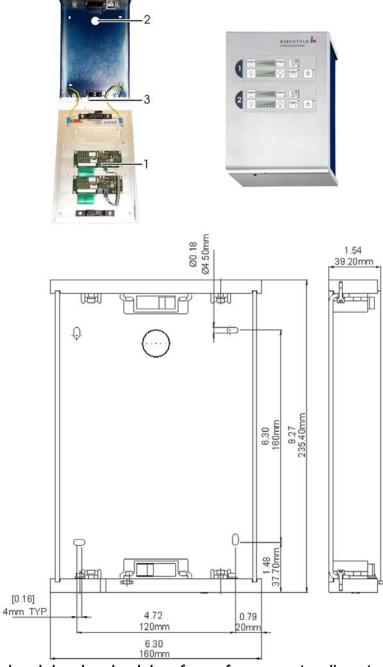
Dimensional drawing, back box for surface mount wall control unit with keypad (dimensions are in inches/mm)
